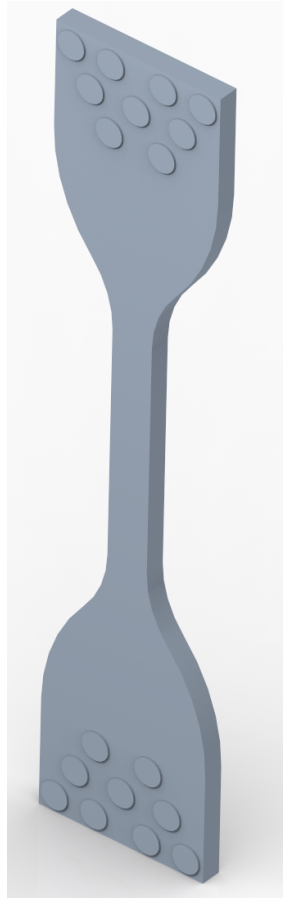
Final modified specimen geometry incorporating additional gripping features to improve clamp stability during tensile testing.
